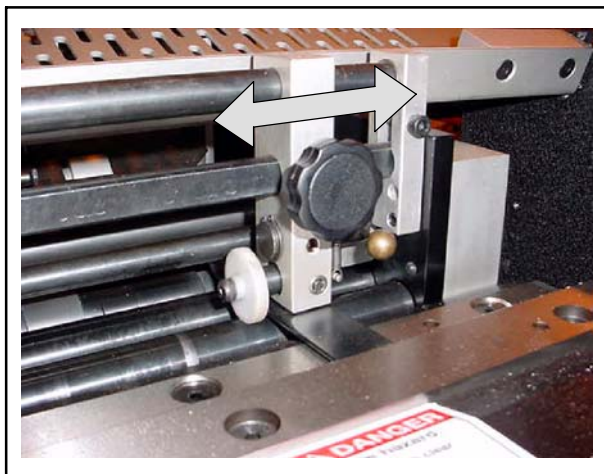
Adjust Sheet Drive / Hold-Down Rollers
